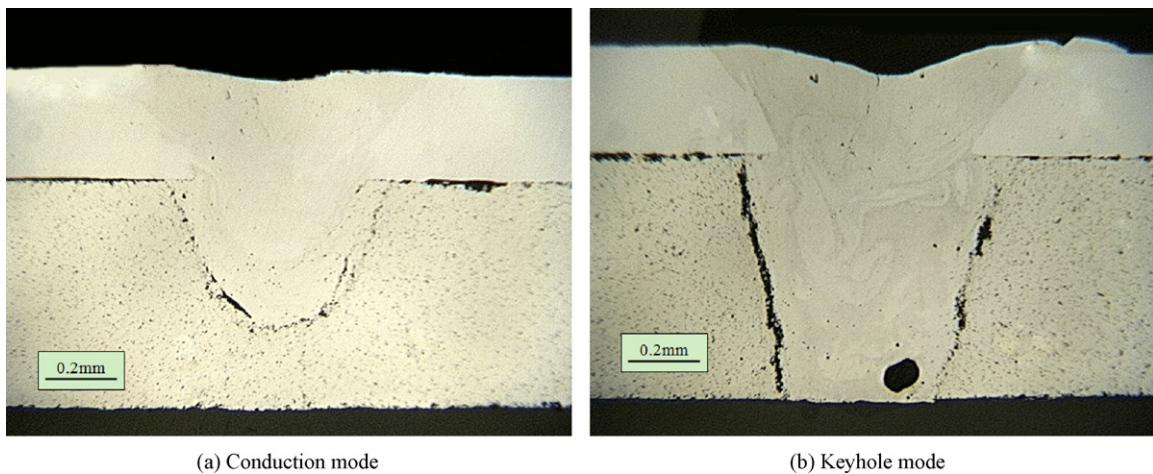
Nuggets formed under two different welding modes. (a) Conduction mode. (b) Keyhole mode.
